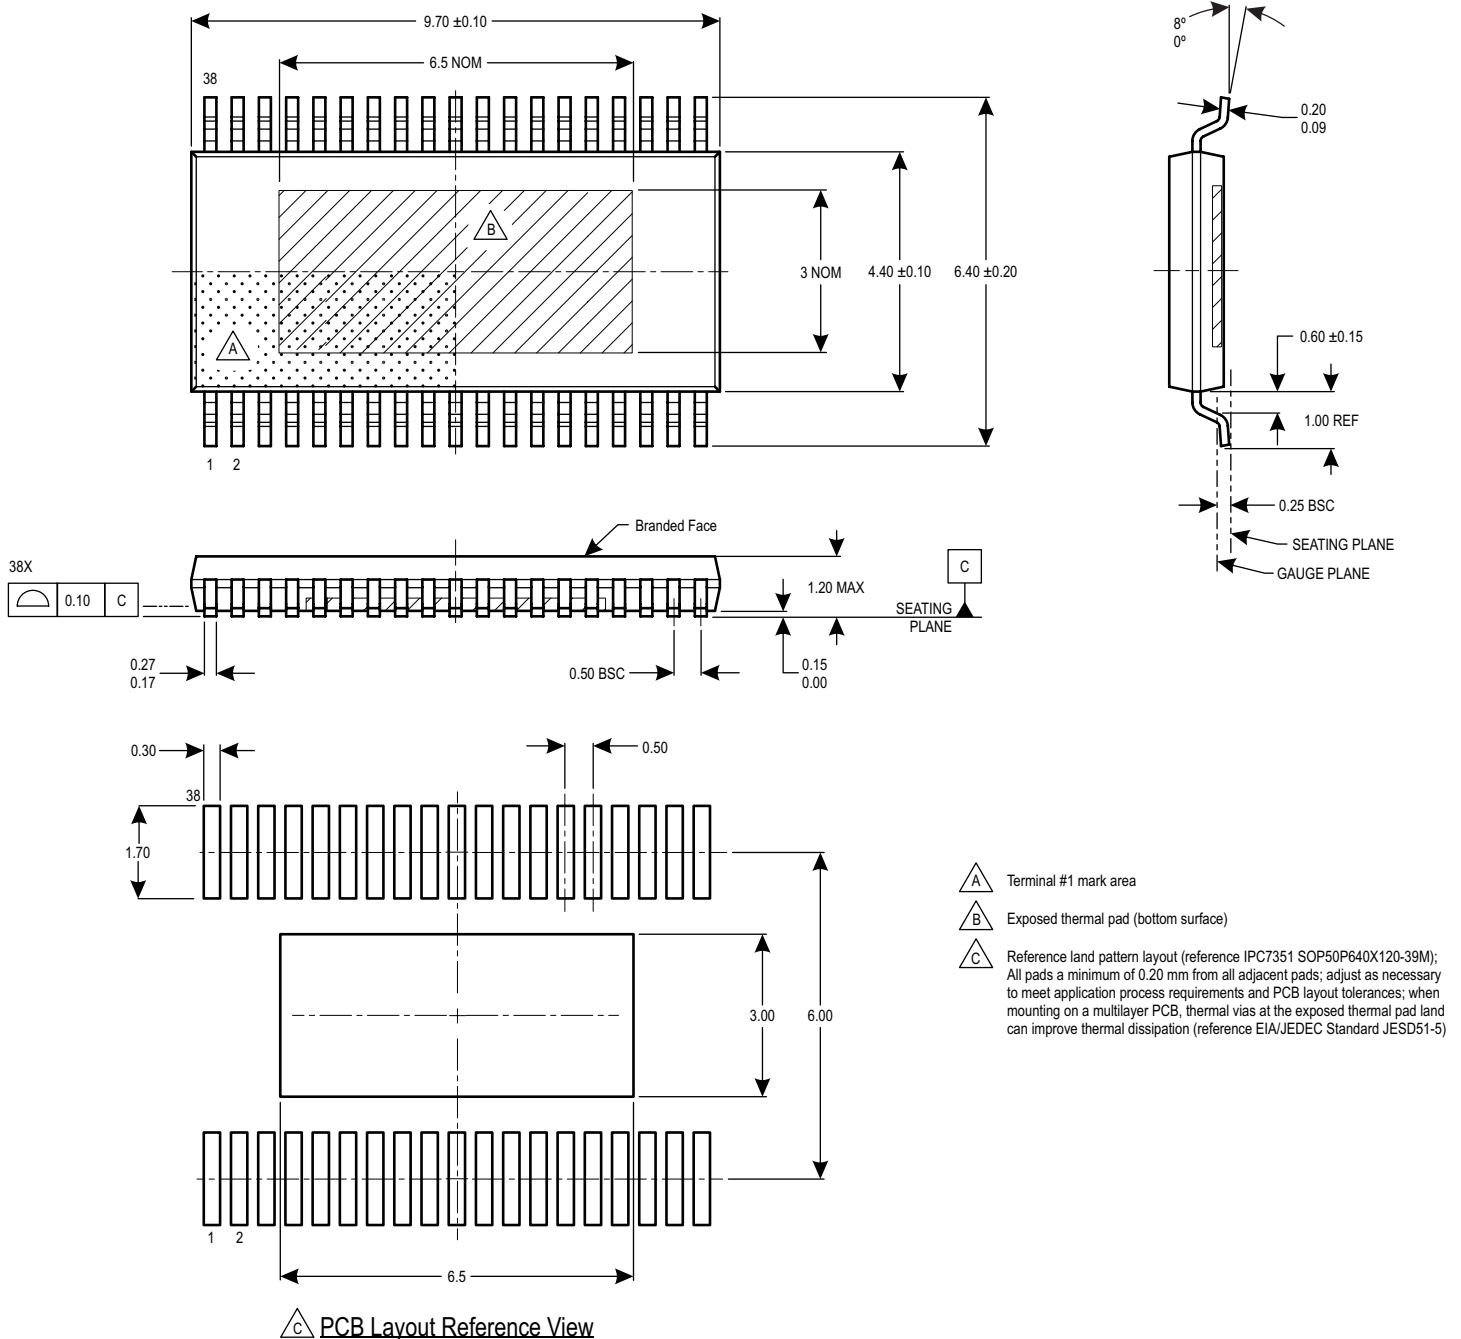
Package LV, 38-Pin eTSSOP with Exposed Pad
